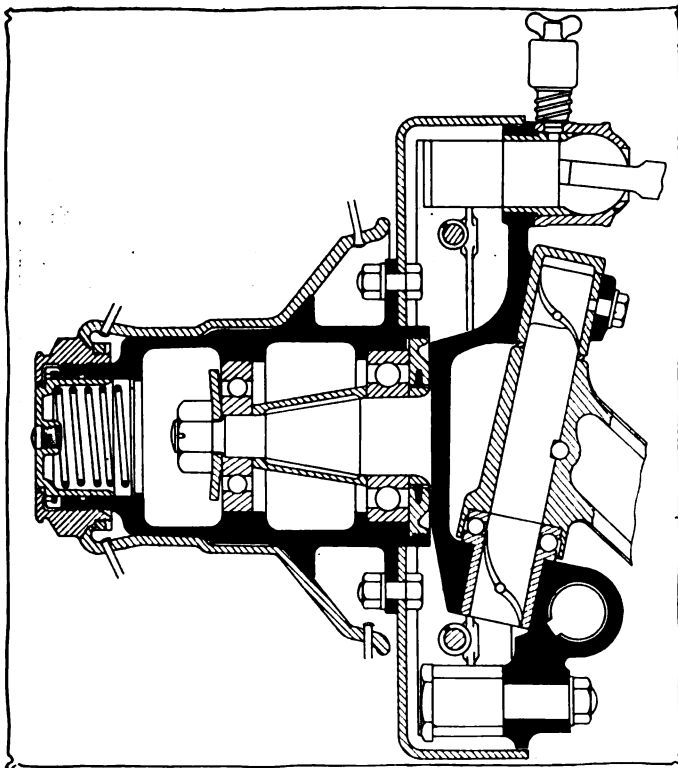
Steering knuckle and front wheel mounting on the Argyle
